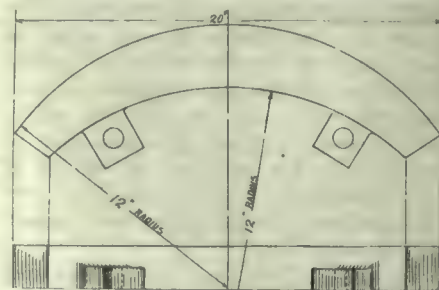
PARTICULARS OF FORMER BLOCK TO BE MOULDED.
